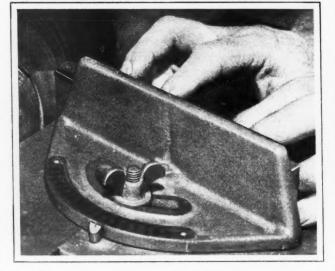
Diamond-lapping of a Carboloy-tipped Tool
